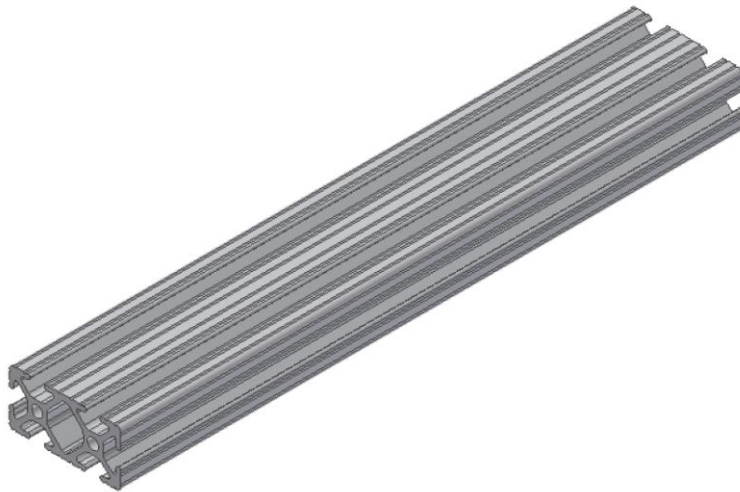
081-33407-600 - 1X2 11.125 in. Extrusion
